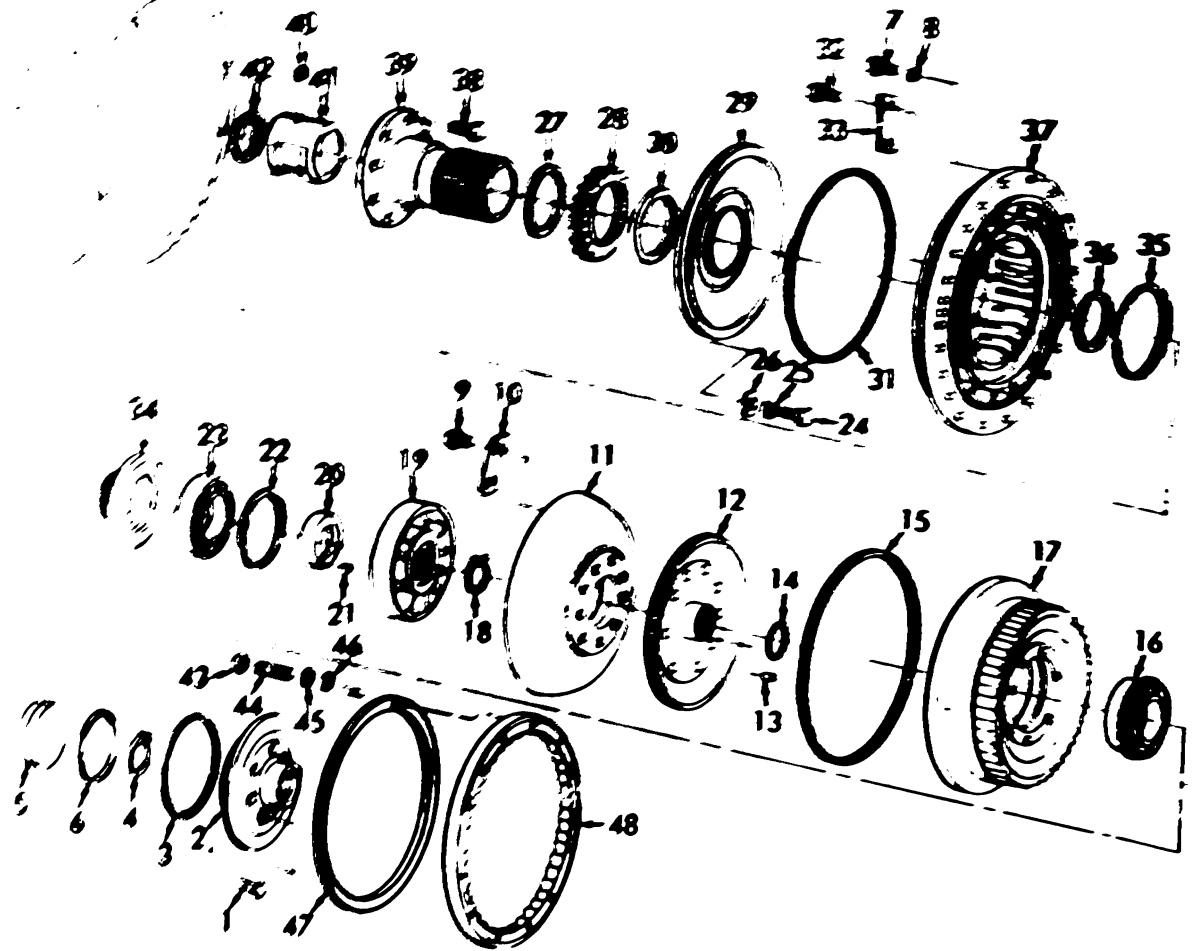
Torque converter, exploded view (sheet 2 of 2).
